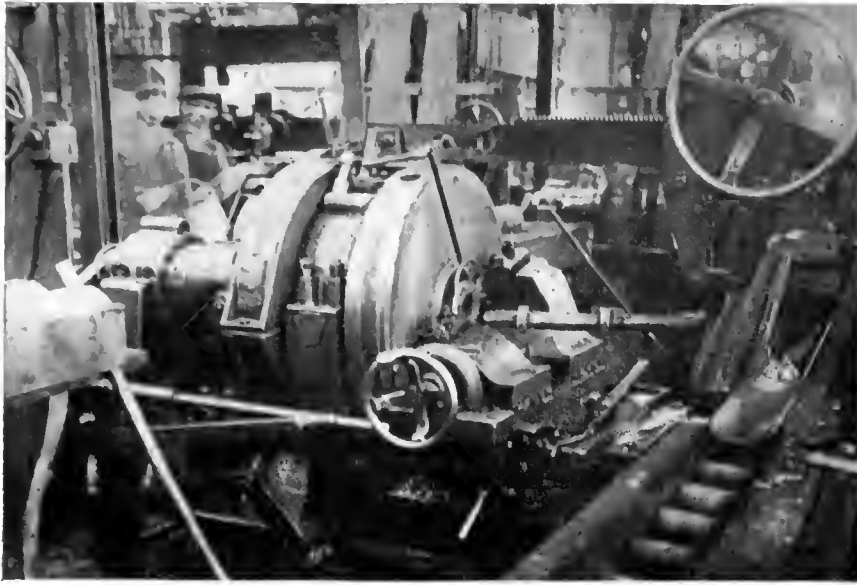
LAUGHLIN-BARNEY CUTTING-OFF MACHINE TRIMMING OPEN END OF SHELLS.
